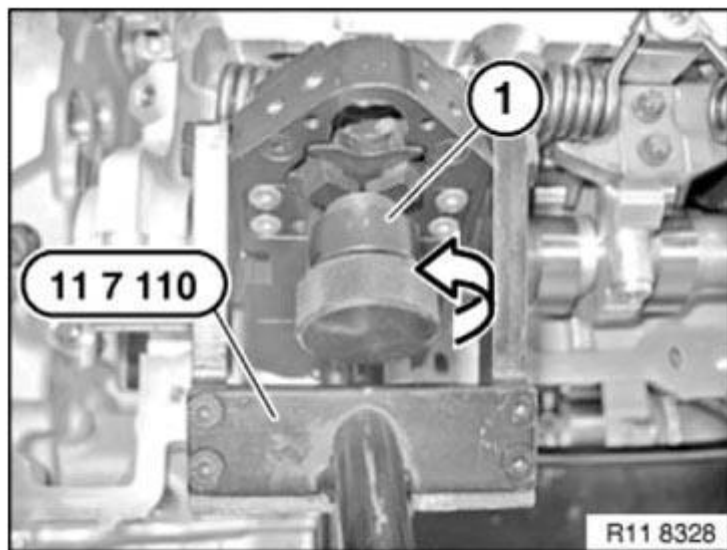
Releasing Knurled Screw On Special Tool (11 7 110)
